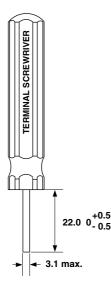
Making an unlocking tool 1–End ground down perpendicular to shaft
